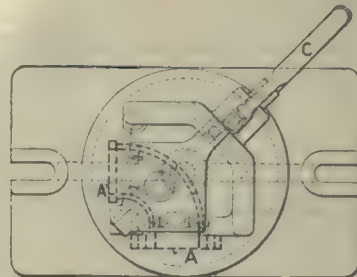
MILLING FIXTURE FOR MANIFOLD ELBOW
